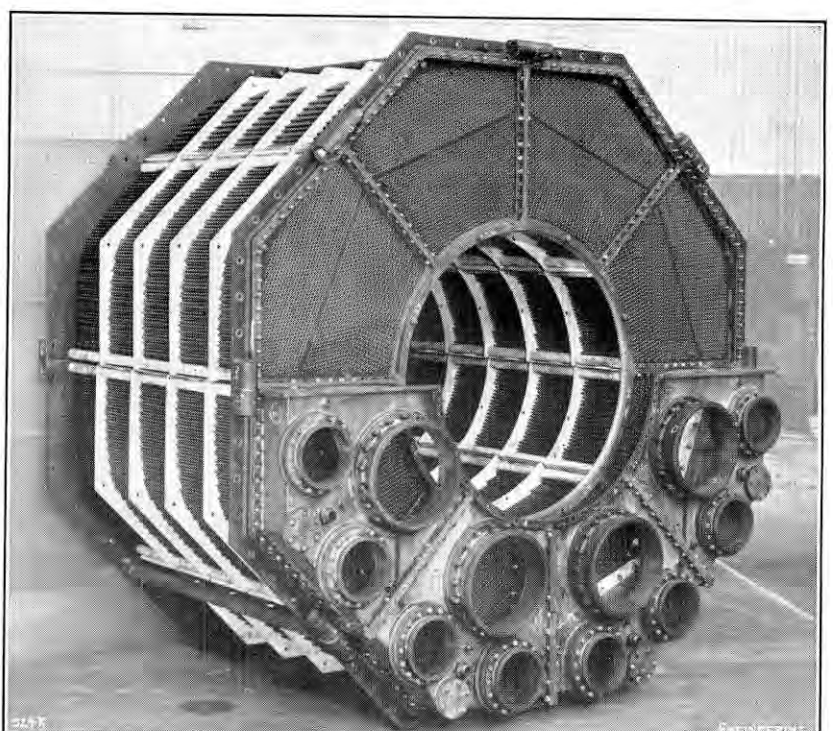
HEAT EXCHANGER; TOP FOUR AIR HEADERS REMOVED.
